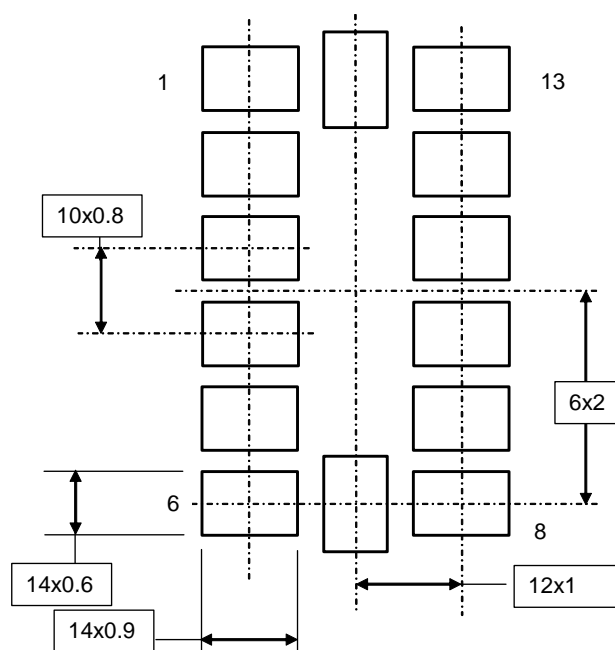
Recommended PCB Land Pattern for the 5 x 3 mm LGA Package
